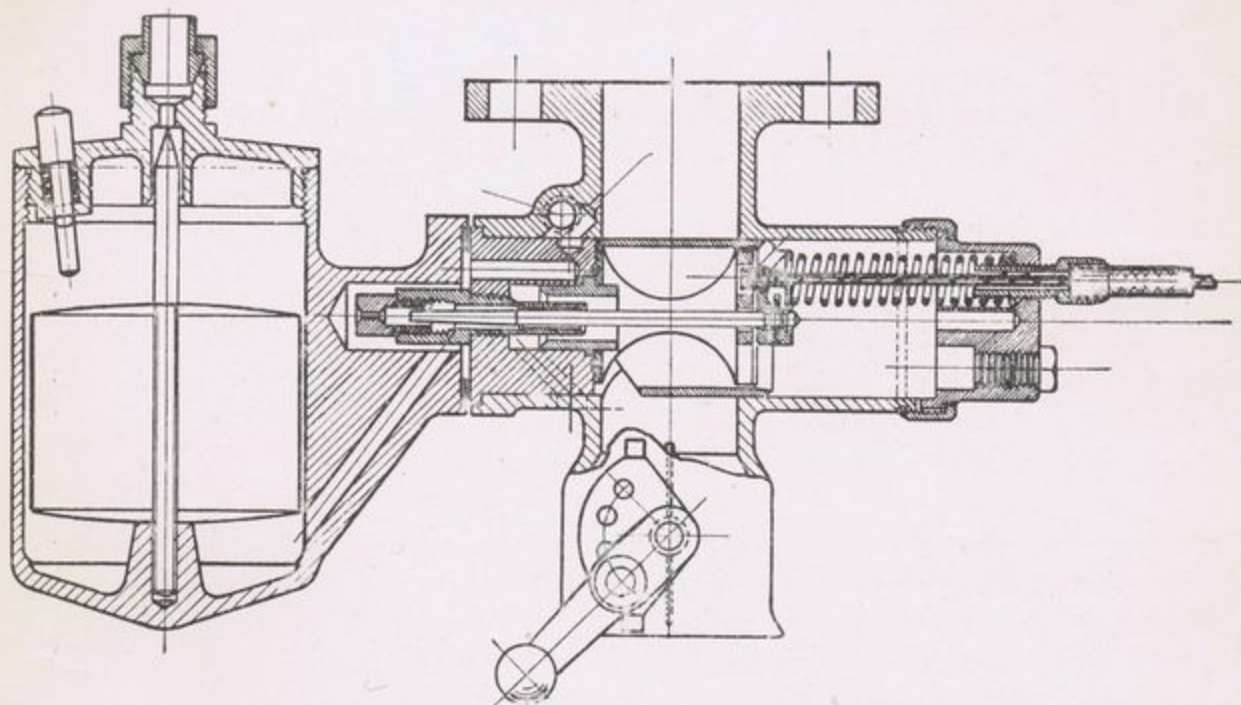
THE SINGLE LEVER HORIZONTAL AMAL CARBURETTOR
